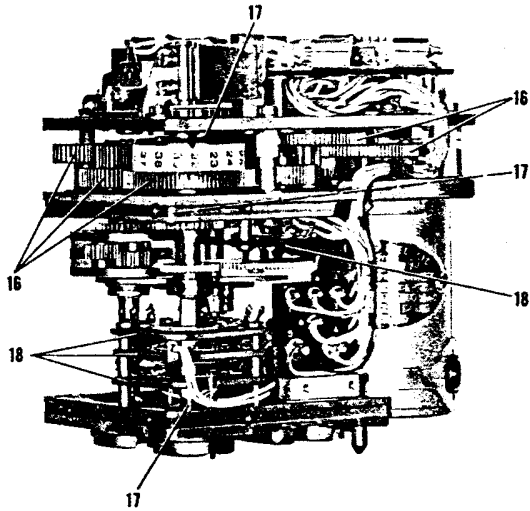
Mechanical Tuning Unit, Lubrication Points, Right Front View
